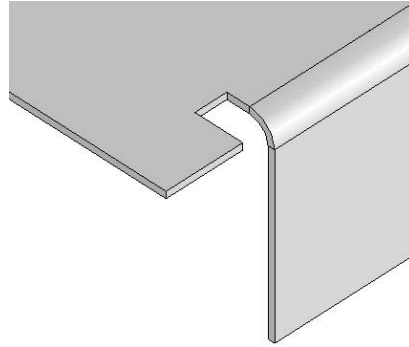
Edge flange created by providing the rectangular relief after modifying the relief ratio
